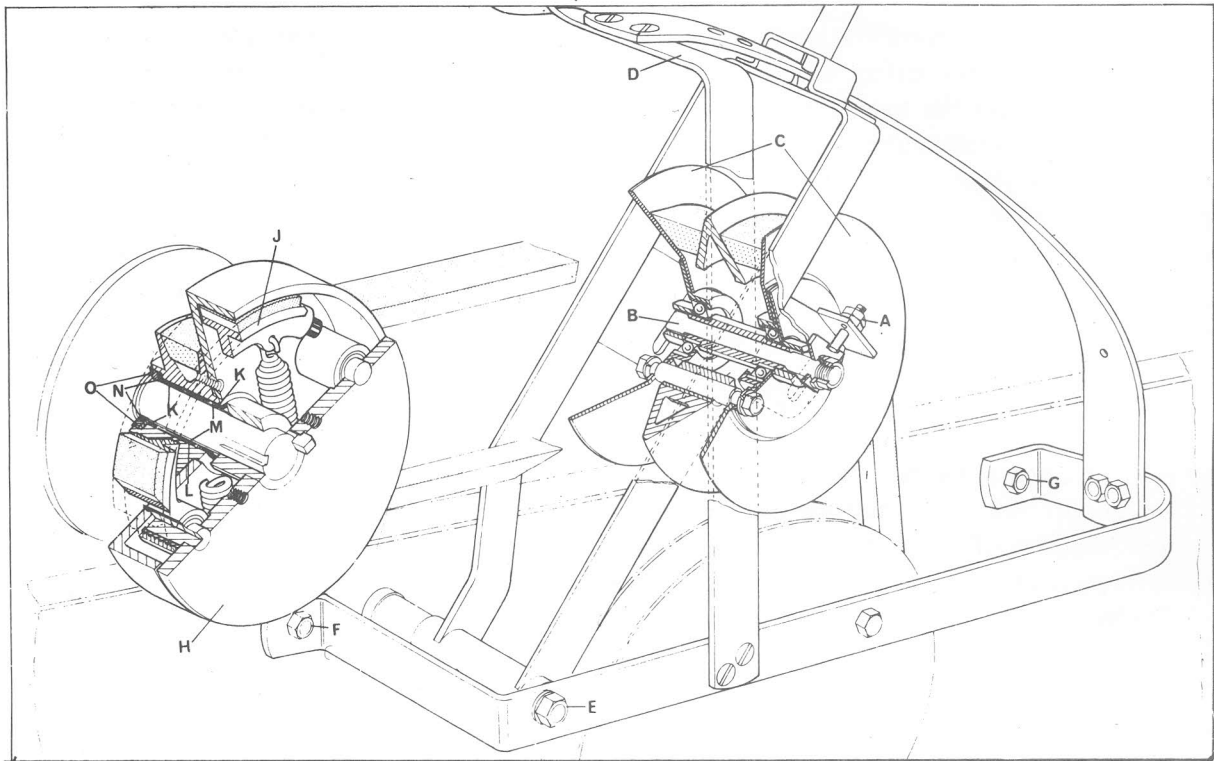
Primary Drive. Marks 1 & 2. Early Type.
